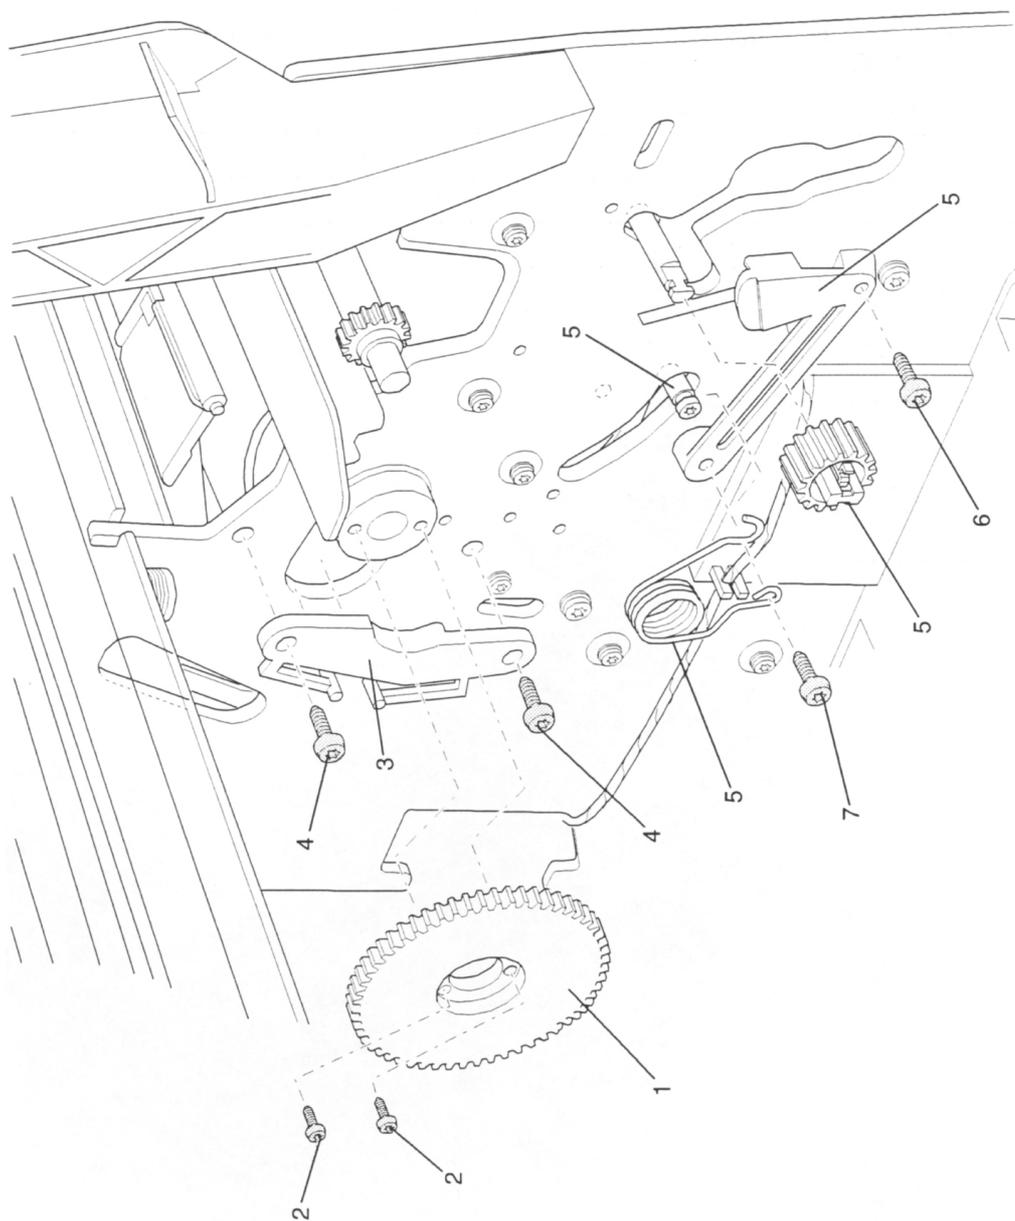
Drive Roller and ARSS Miscellaneous Parts
